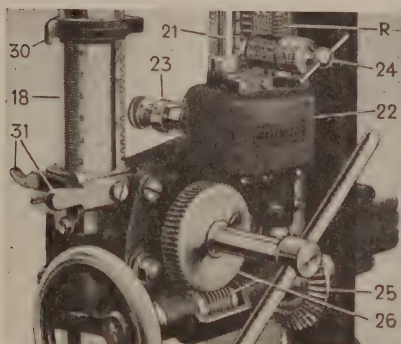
Feedbox, bevel gears, worm, and wormwheel (with guards removed), numbered the same as Fig. 9.
